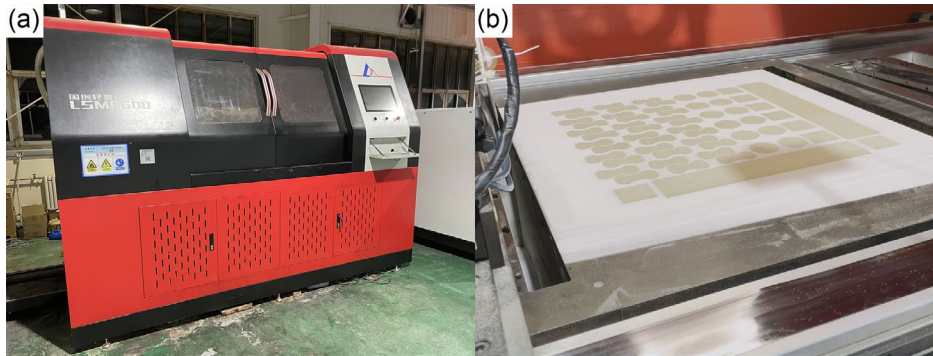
LSMP600 sand-mold 3D printer (a) and binder-printed pattern on the sand-bed surface during printing (b)
